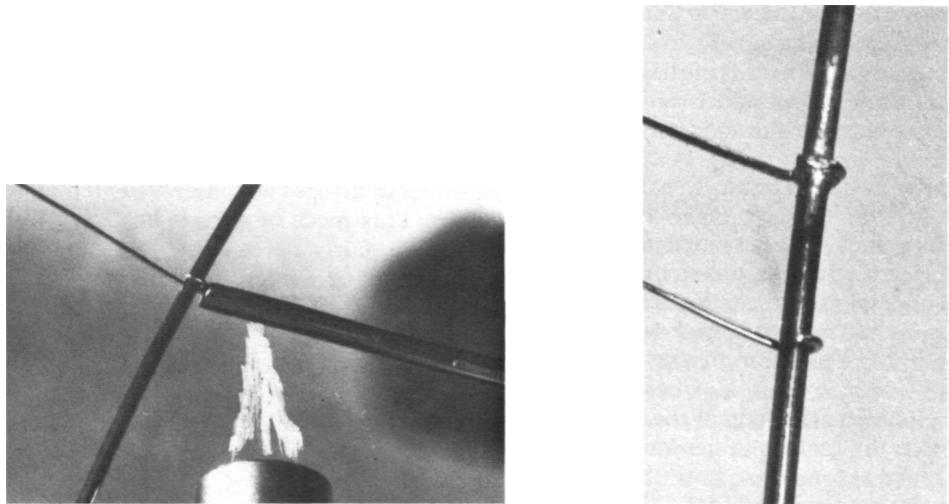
Soldering a very thin wire to a thick wire. A, A soldering iron of thick copper wire is used. B, A joint before and after soldering.
